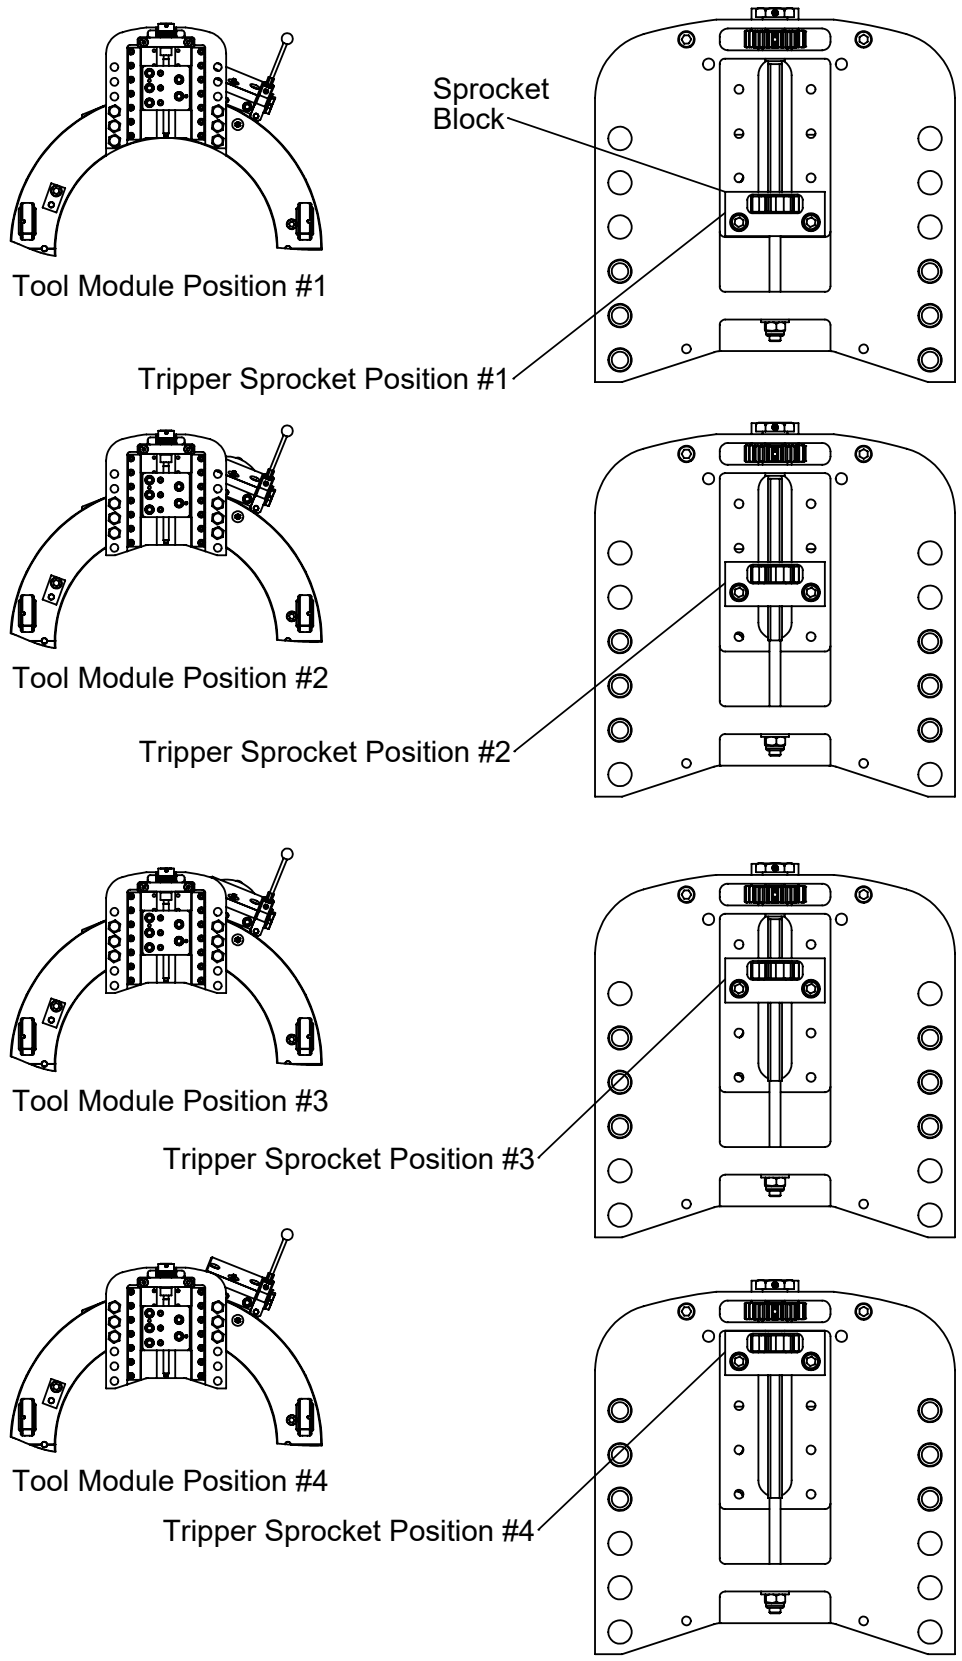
Positions for Tool Module and Tripper Sprocket Timing
